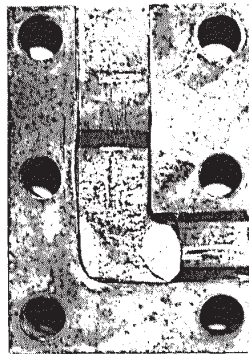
Photograph showing the change in shape of the Al-Ti-Mn alloy specimen by incomplete side extrusion.
